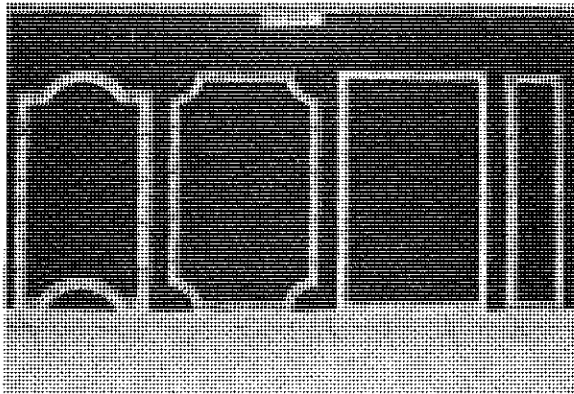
Four mating inserts of fixtures shown in Figs. 4, 5, and 6.
